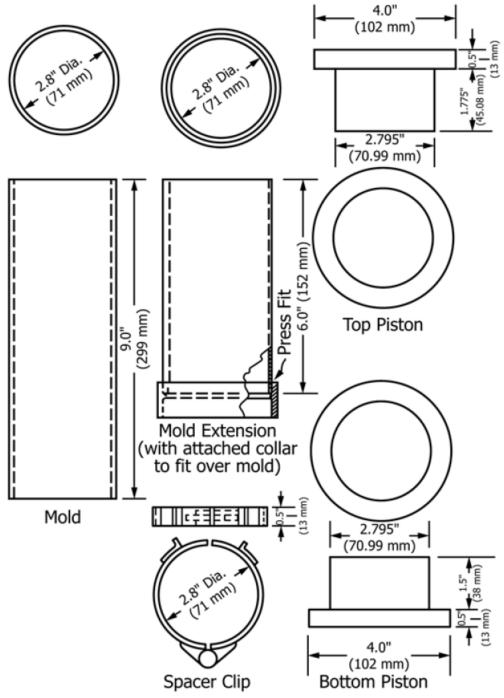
Soil cement SM method equipment details (ASTM D1632 2017)
